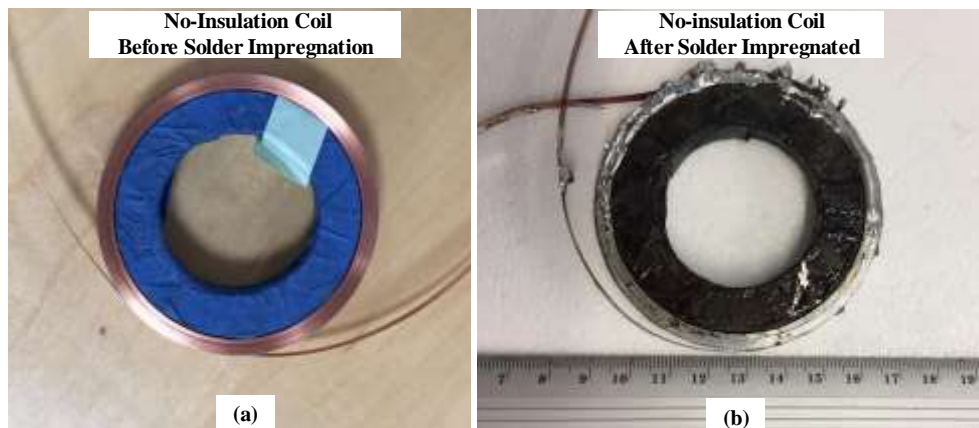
Photos of no-insulation REBCO coil magnet (a) before solder impregnation and (b) after solder impregnation.
